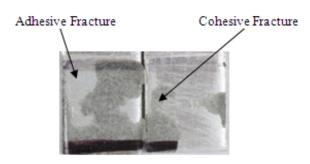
Single-lap shear specimen fractography of (a) adhesive joint with no filler and (b) adhesive joint mixed with silica powder.
